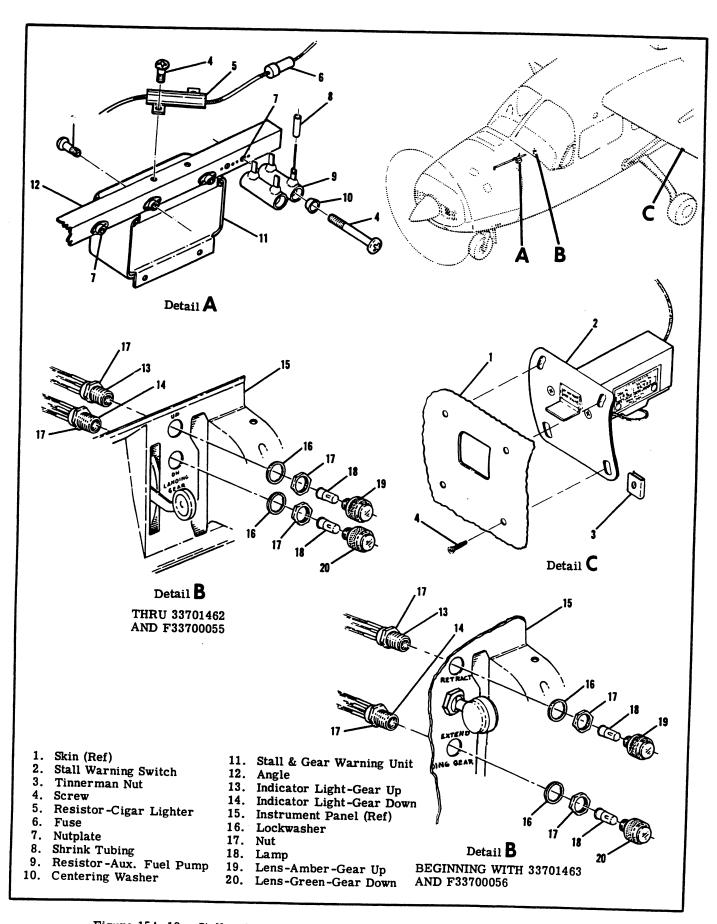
A-18. Stall and Gear Warning Horn and Gear Indicator Light Installation
